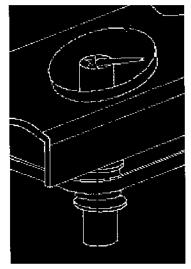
(a) Opening roll modified into a Hollow Spindle
